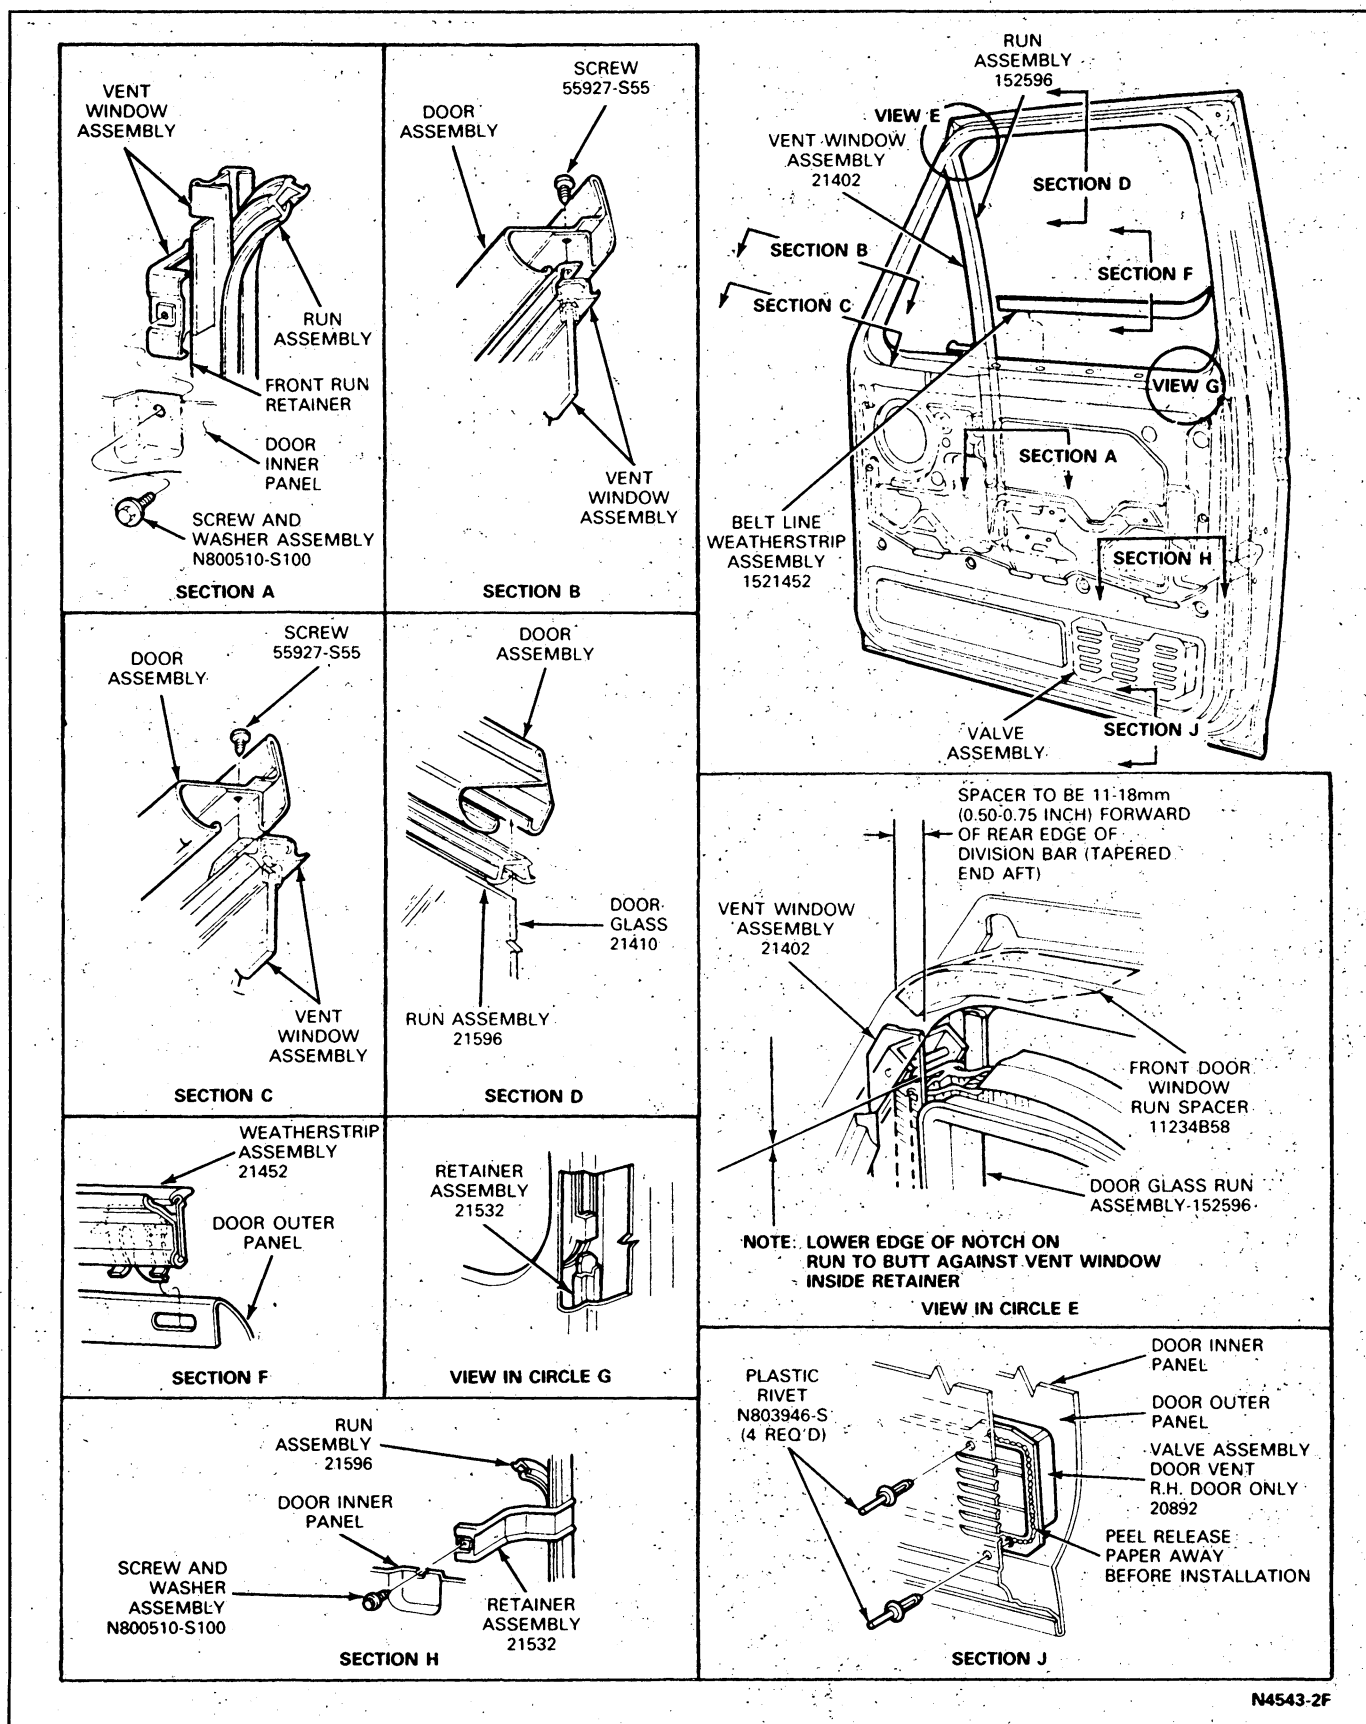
Front Door Window Glass—F-150—F-350, F-Super Duty and Bronco
